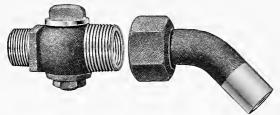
BENT COUPLING FOR PAYNE MACHINE.
